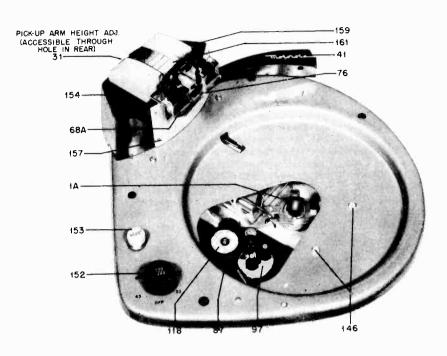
TOP VIEW OF RECORD CHANGER WITH TURNTABLE REMOVED
